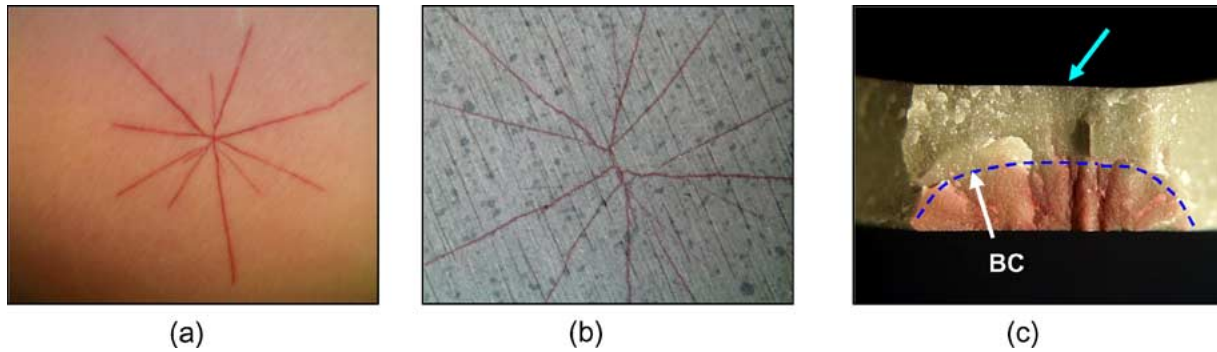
Typical examples of well-developed back-side radial cracking and fracture surface: (a) AS800 silicon nitride disk impacted at 300 m/s (before strength testing); (b) SN282 silicon nitride disk impacted at 300 m/s (before strength testing); (c) fracture surface of the AS800 specimen (in (a)) showing back-side cracks (BC) and a failure origin with an arrow. The corresponding post-impact strength was 450 and 96 MPa, respectively, for AS800 (in (a)) and SN282 (in (b)) specimens.
